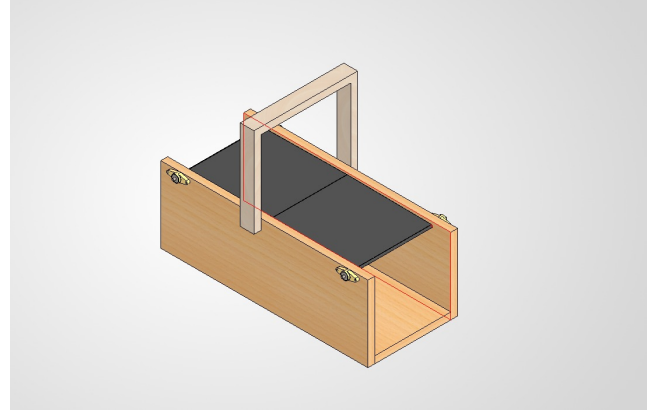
Experimental assembly line prototype showing the industrial webcam mounting setup for fabric inspection. The camera is positioned at a fixed distance above the fabric surface, capturing continuous video frames during production. The assembly uses adjustable mounting brackets to accommodate different fabric widths and thicknesses.
